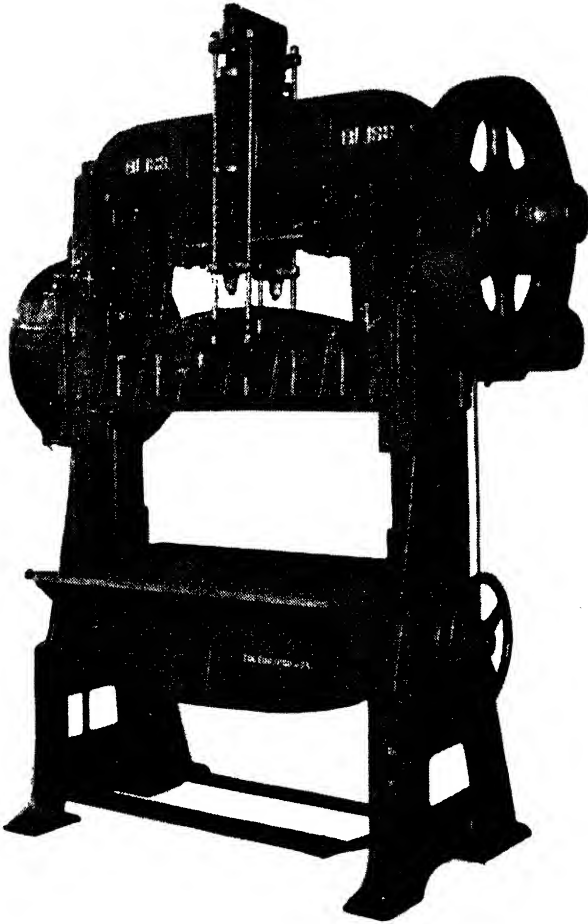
For hollow cutter blanking of multiple thicknesses, this press is fitted with bottom adjustment to permit refinishing a wood cutting block.
